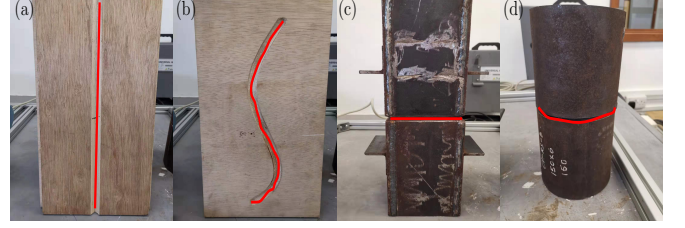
Experimental welding workpieces with their welding groove colored by red. According to shape of welding groove, the workpiece is defined as: (a) Straight-line. (b) Curve-line. (c) Box. (d) Cylinder.
